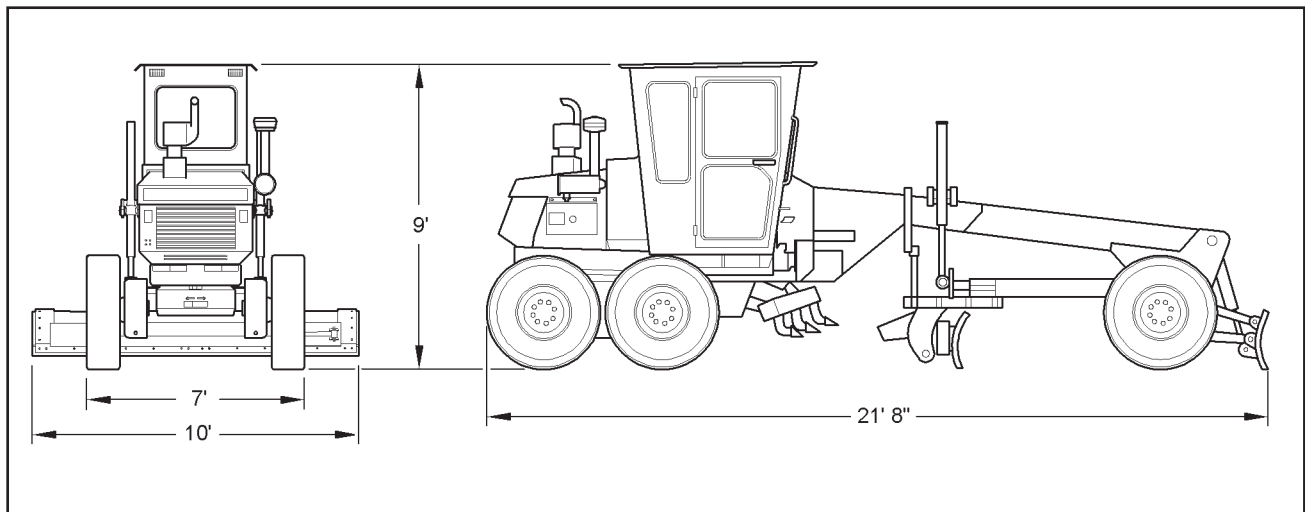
OUTLINE DIMENSIONAL DRAWING
